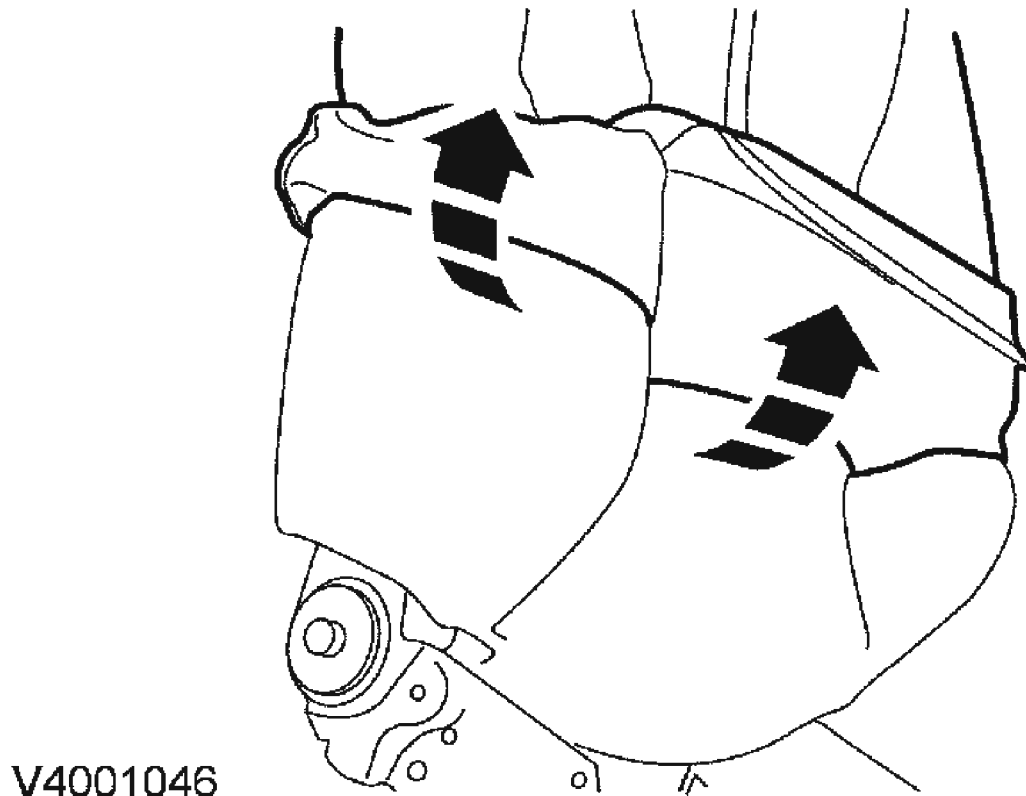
Rolling Trim Cover And Assembly Aid Bag Up Backrest To Access Lower Ends Of Tensioning Rods
